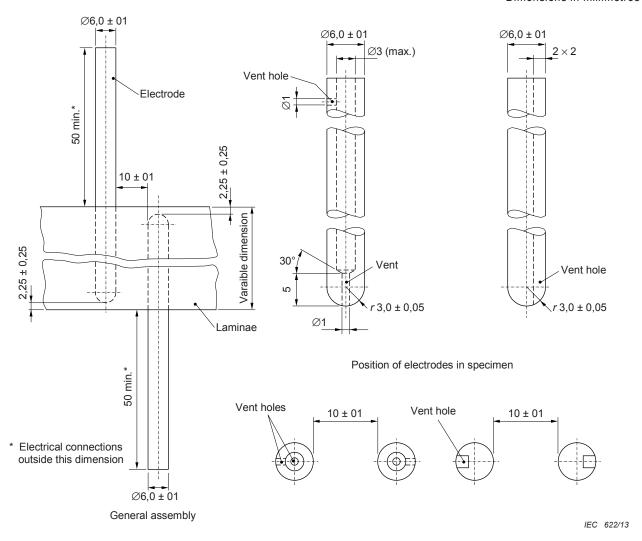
Arrangement for tests parallel to the laminae for boards more than 15 mm thick with parallel cylindrical electrodes (see 5.3.4)
